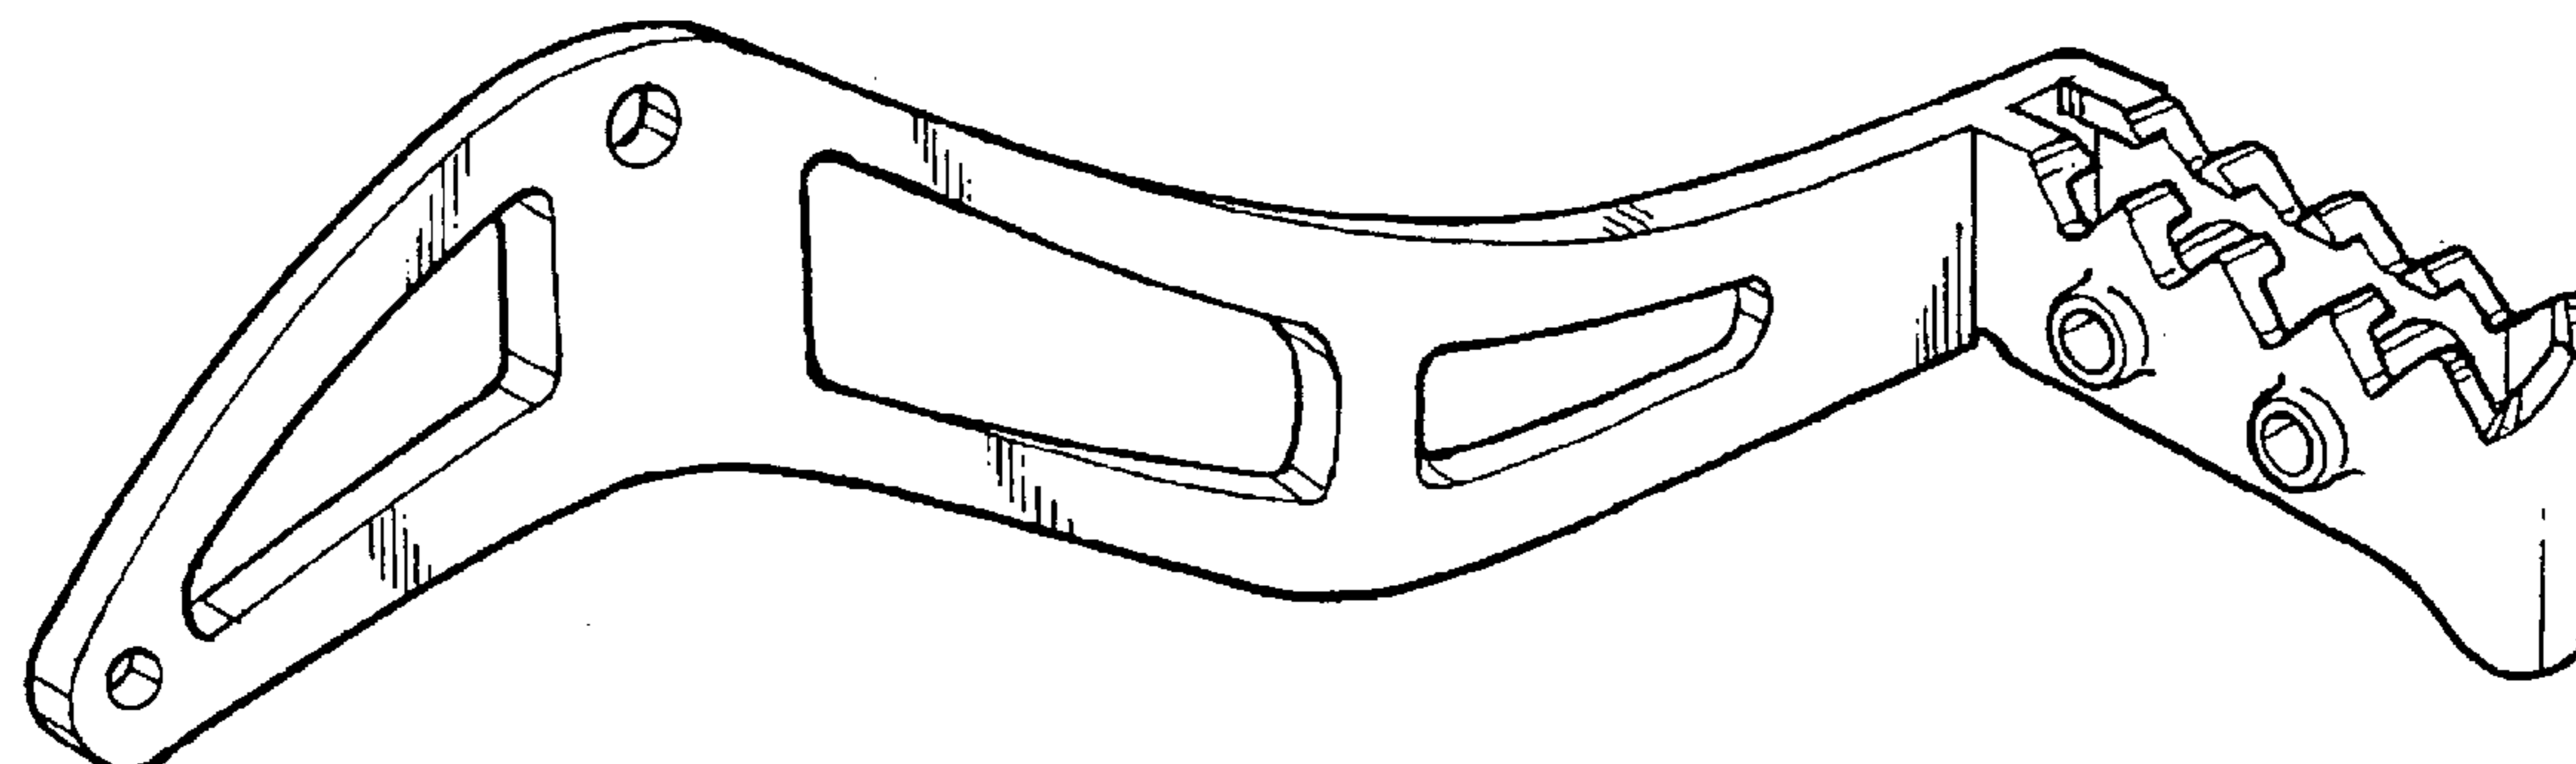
is a perspective view of a motorcycle brake lever showing my new design;
